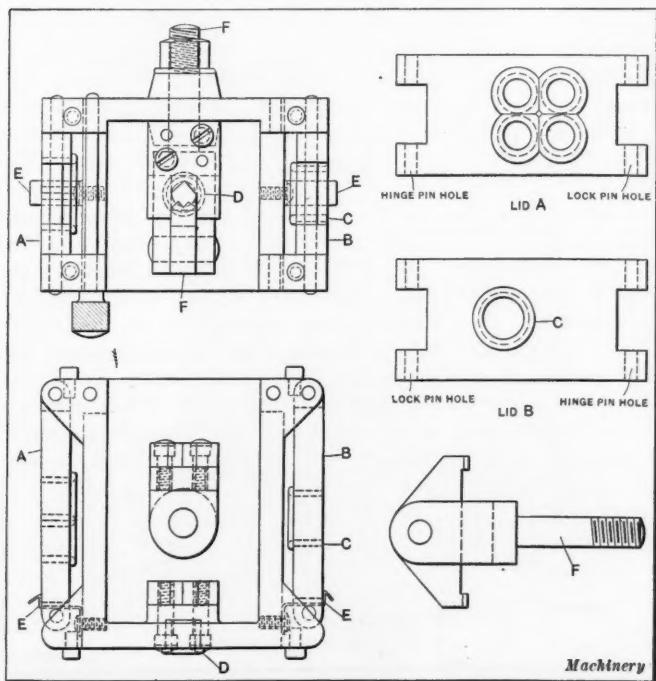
Fixture and Detail Views of Lids A and B and Clamp F
